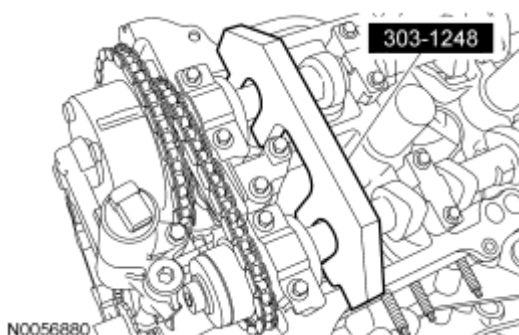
Installing Special Tool (303-1248) Onto Flats Of LH Camshafts
